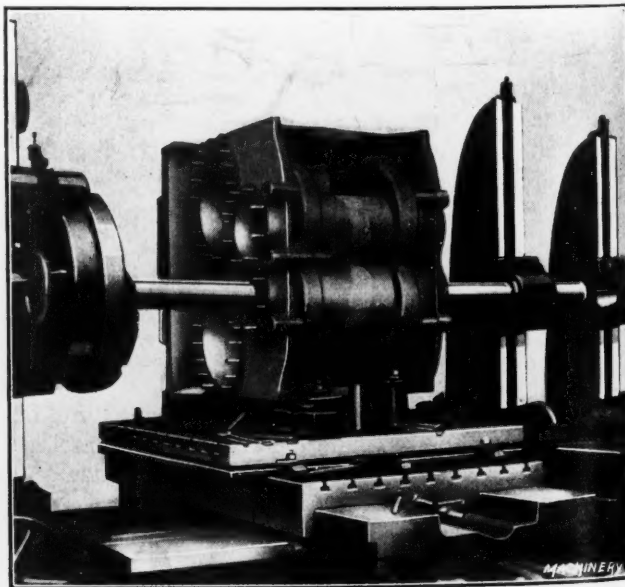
Boring Valve Lines of Cylinder Shown in Fig. 1
